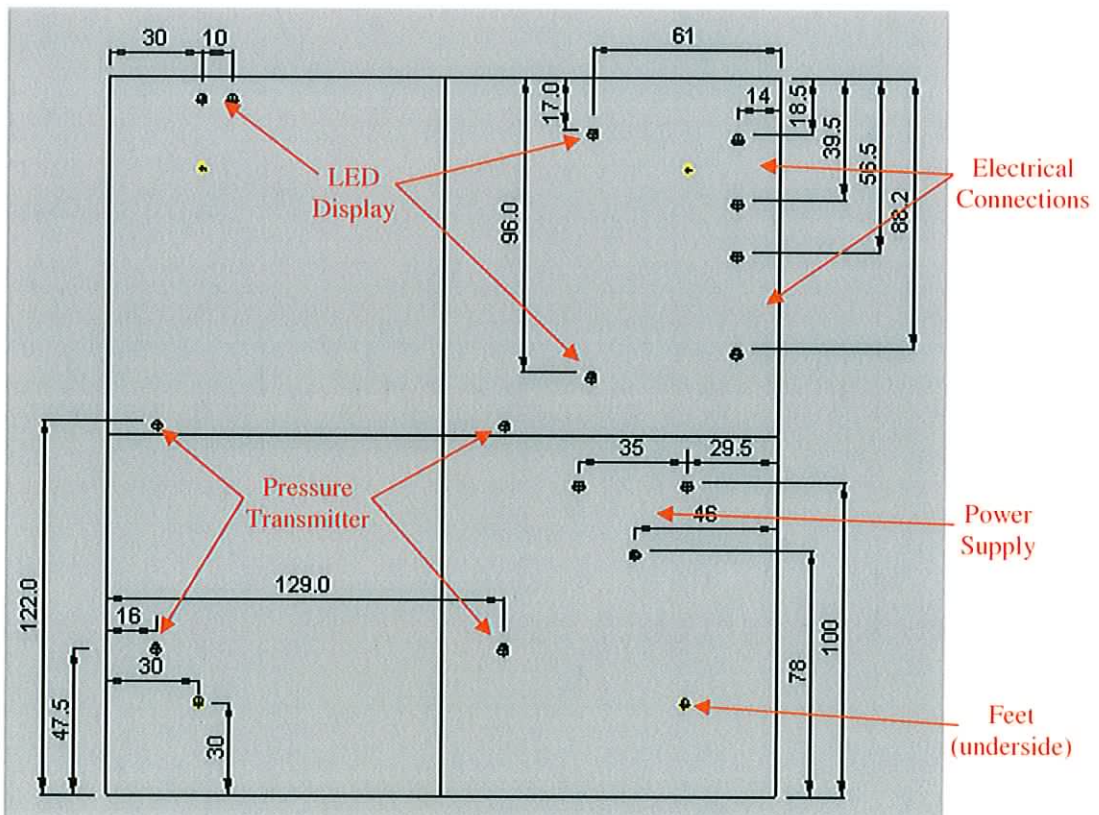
Right and Left views of the Vacuum Formed housing showing dimensions in mm.
